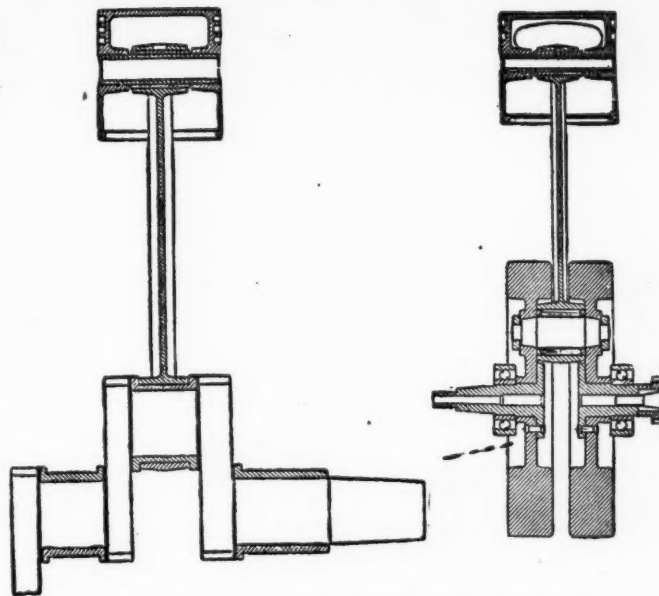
Section of crank, piston and connecting rod, 90 by 130 mm. touring car engine and 85 by 88 mm. motorcycle engine
